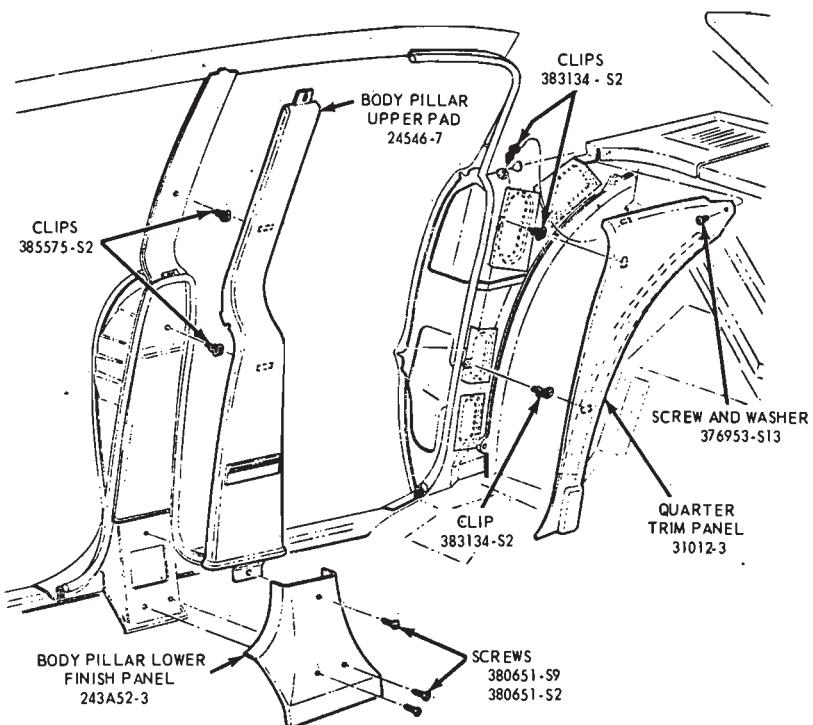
Typical Four Door Center Pillar and Quarter Trim Panels—Continental Mark III and Thunderbird Shown
